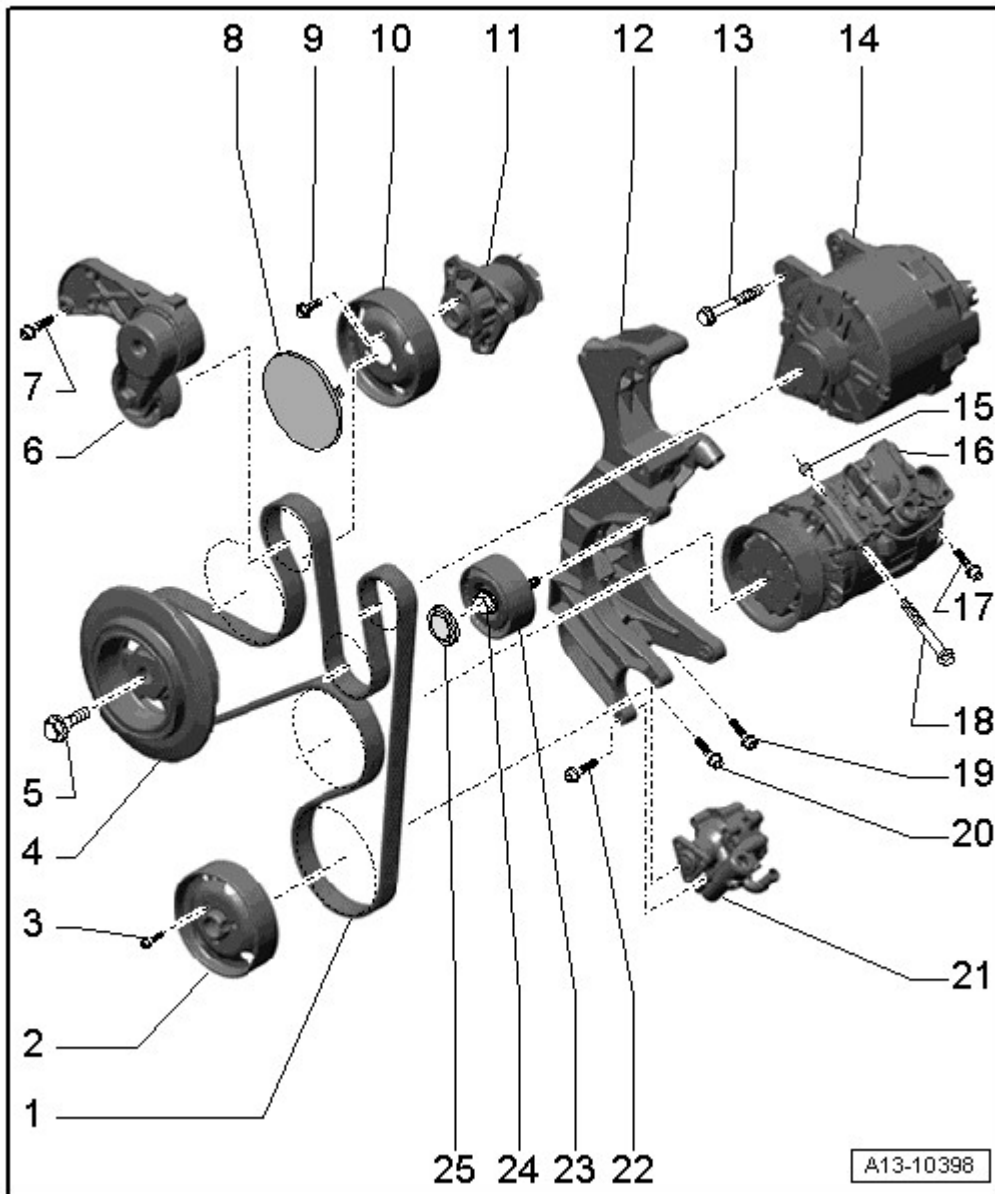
Identifying Ribbed Belt Drive, Assembly Overview
